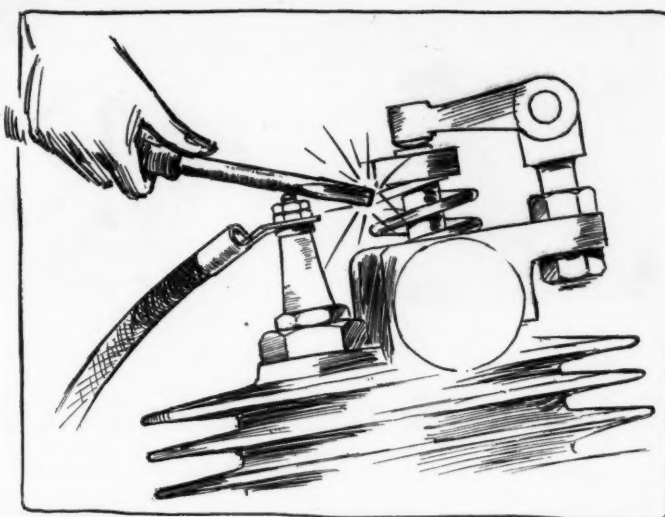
To study each cylinder separately, cut out the spark of one by shorting the plug with a screwdriver
